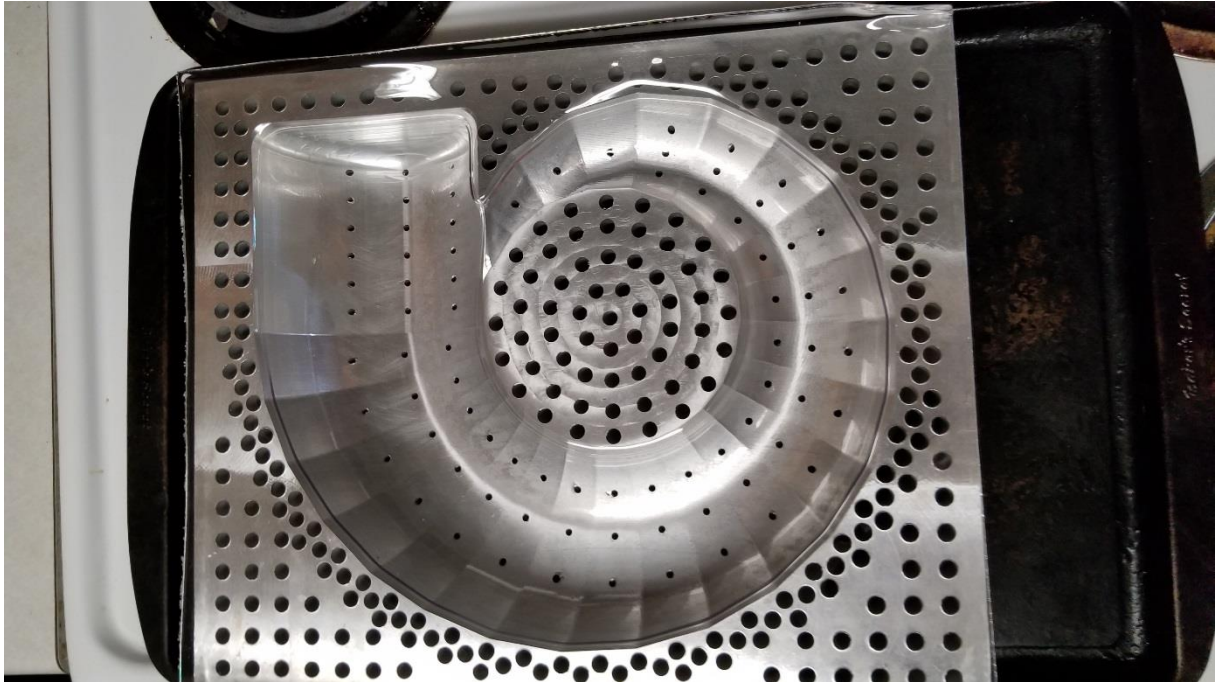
Initial PETG vacuum form test result still on the mold.
